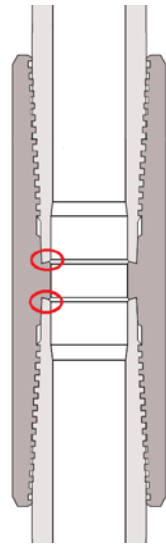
Box with torque shoulder (Seal-lock APEX, Hunting) [13]
